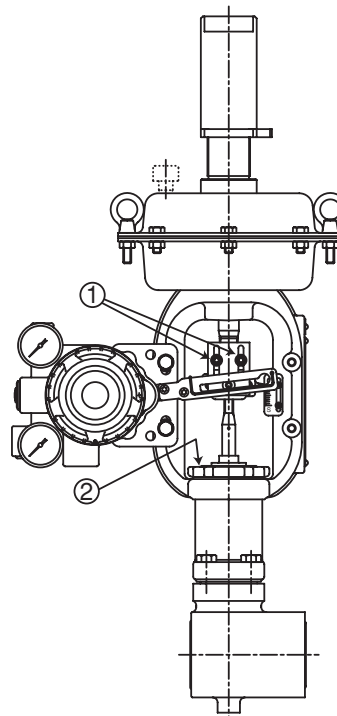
Locations of Stem Connector Bolts and Yoke Clamping-nut
